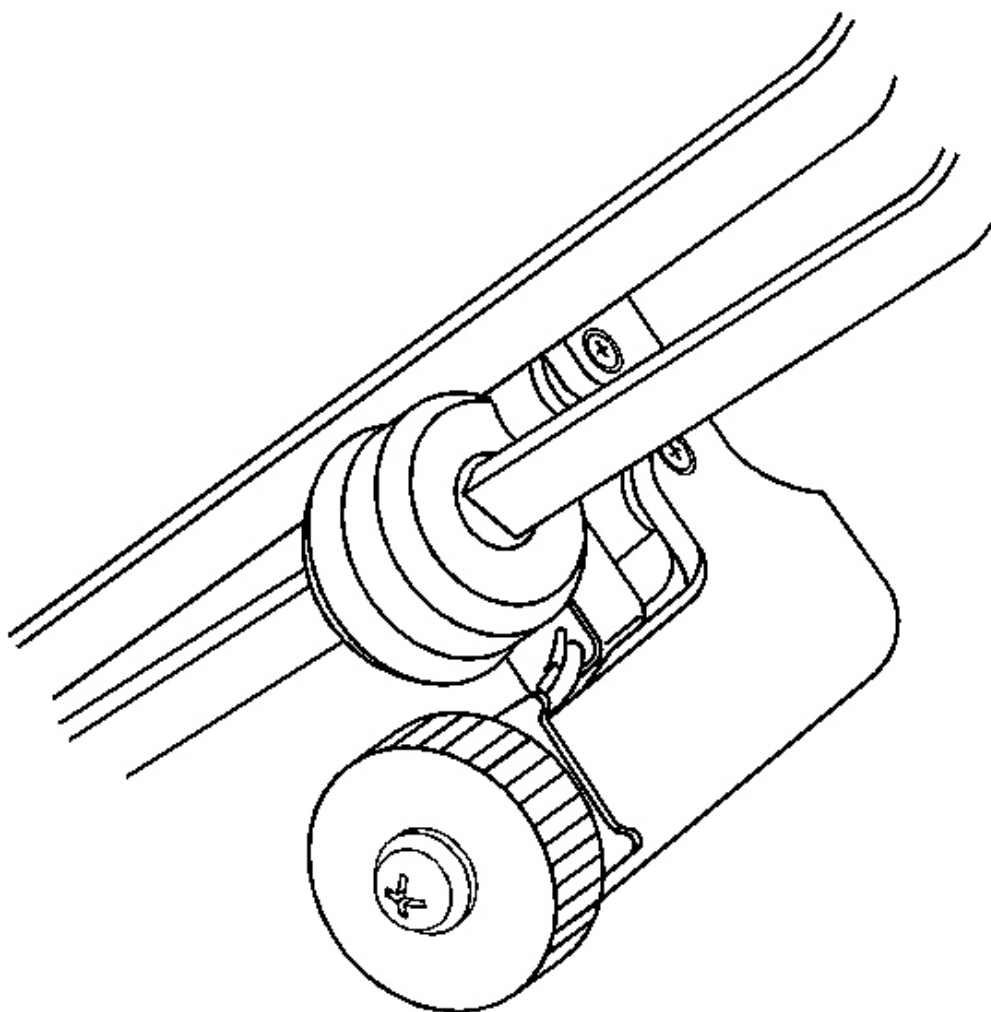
Sectioning Brake Pipe Using Pipe Cutter
